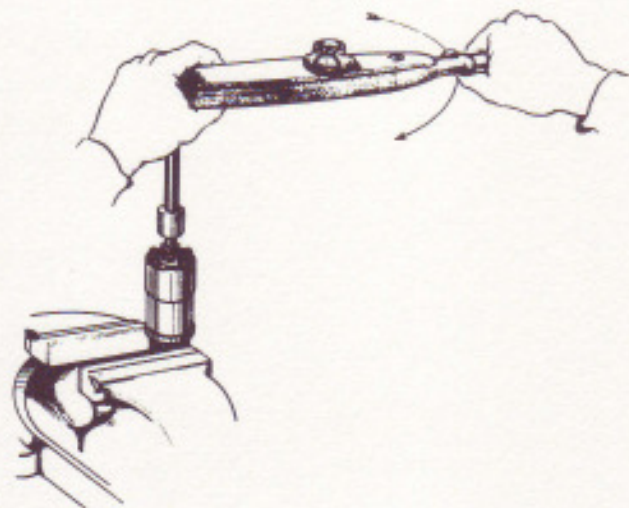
MEASURING SLIPPING TORQUE OF CLUTCH WITH A TORQUE SPANNER.
